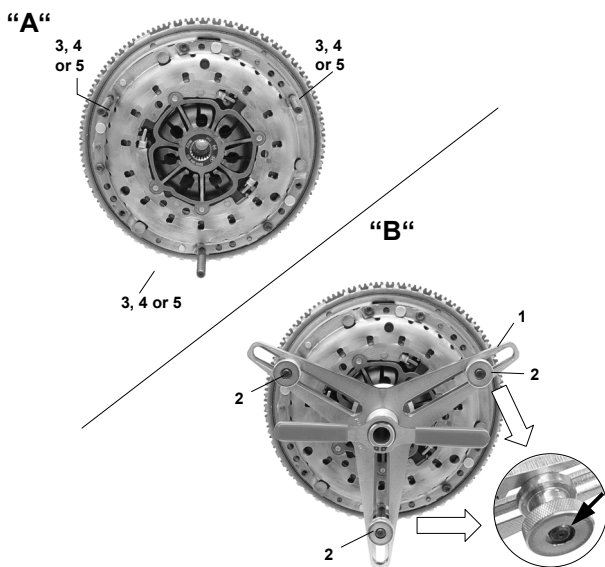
Screw in pressure spindle, unscrew retaining screws.
